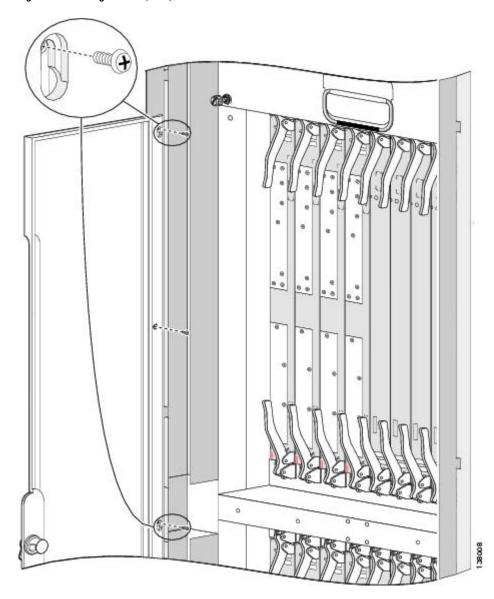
Attaching the Rear (MSC) Side Exterior Doors
